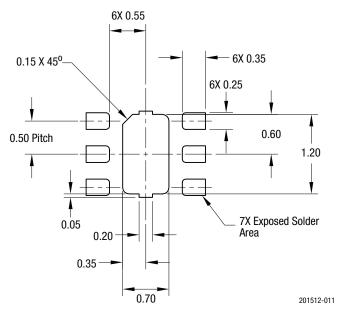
SKY65404-31 PCB Layout Footprint (Top View)
